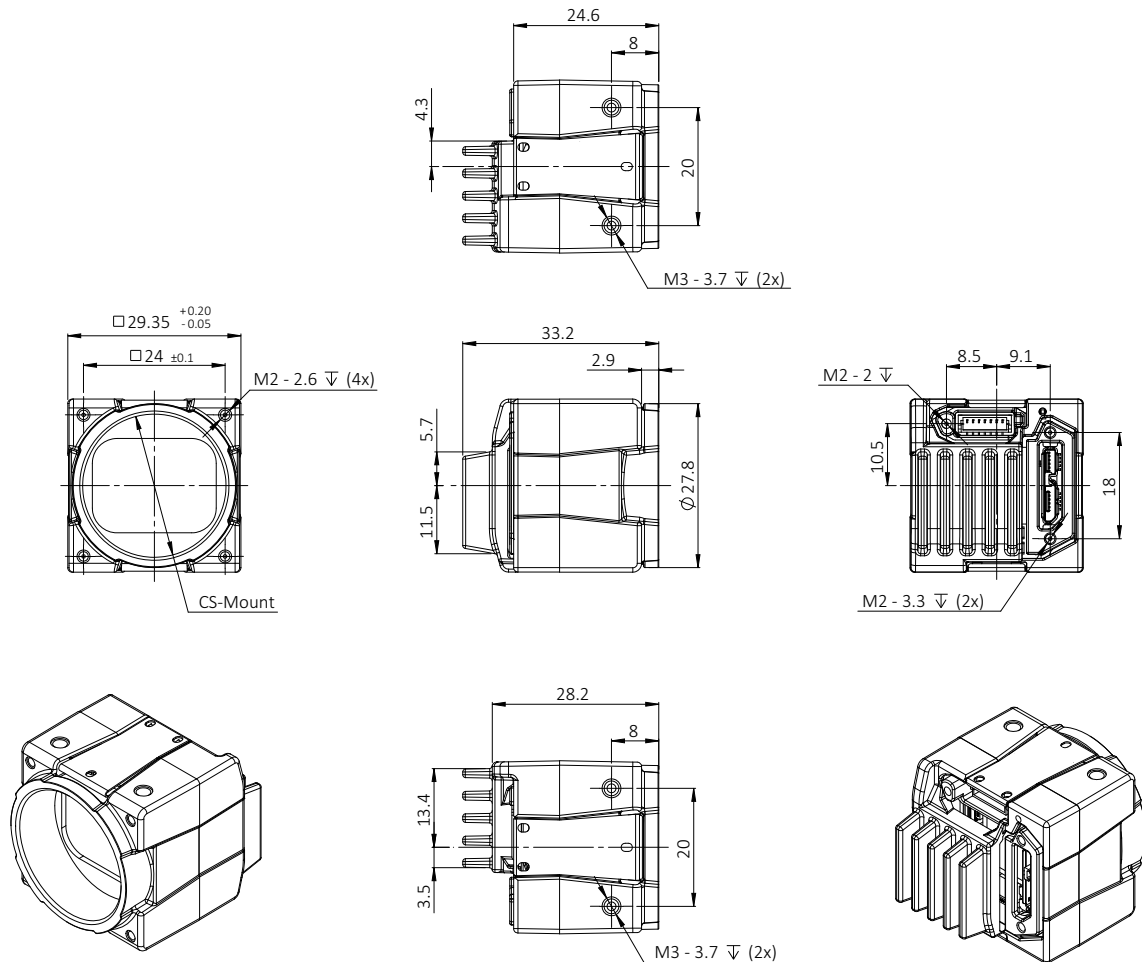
Closed Housing CS-Mount 180° (standard Alvium) dimensions
